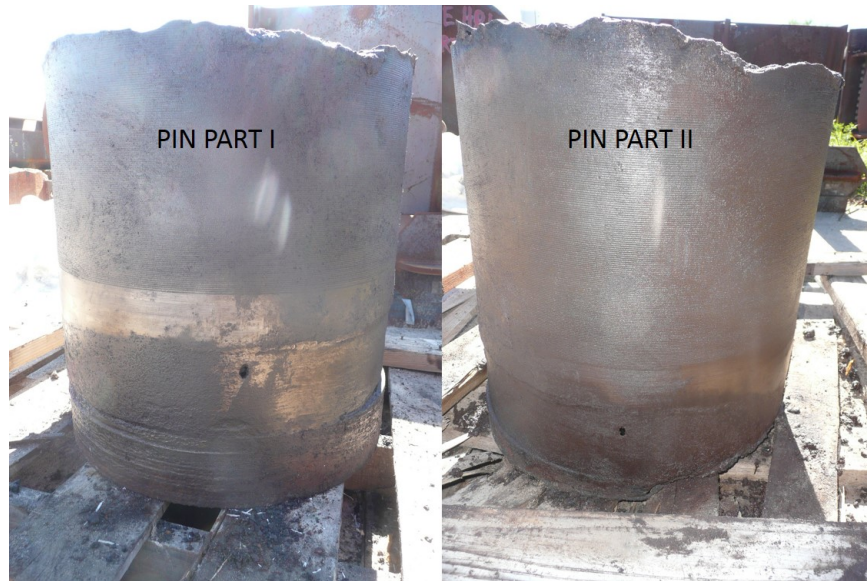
Grease holes in both Pin Parts I and II during the visual inspection.
